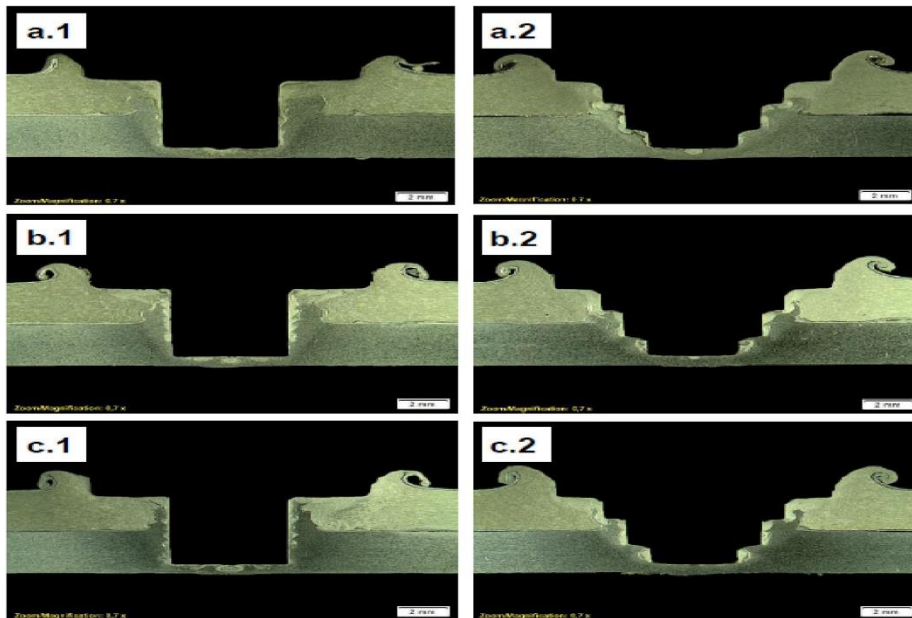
Cross-sectional macrographs of dissimilar AA2024-O/AA6061-T6 weld joints prepared using: (1) cylindrical pin and (2) stepped pin at tool rotation speeds of: (a), (b) and (c) 900, 1400 and 1800 rpm respectively.
